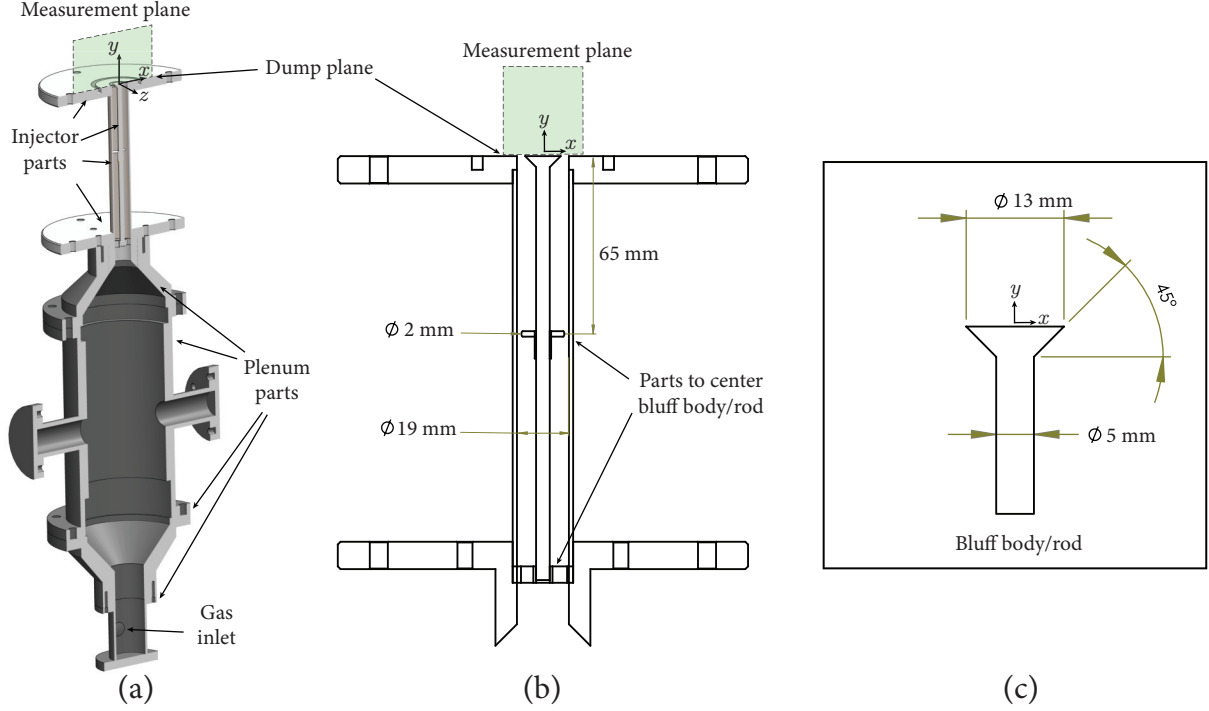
(a) Schematic of the single sector combustor. (b) Schematic of the injector pipe assembly. (c) Schematic of the bluff body/rod.
